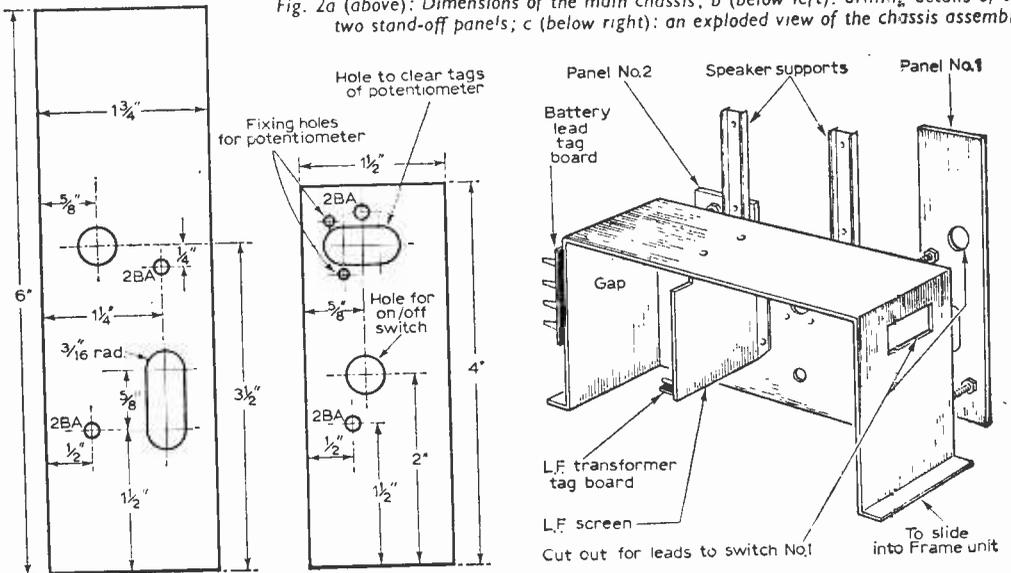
(above): Dimensions of the main chassis; b (below left): drilling details of the two stand-off panels; c (below right): an exploded view of the chassis assembly.
